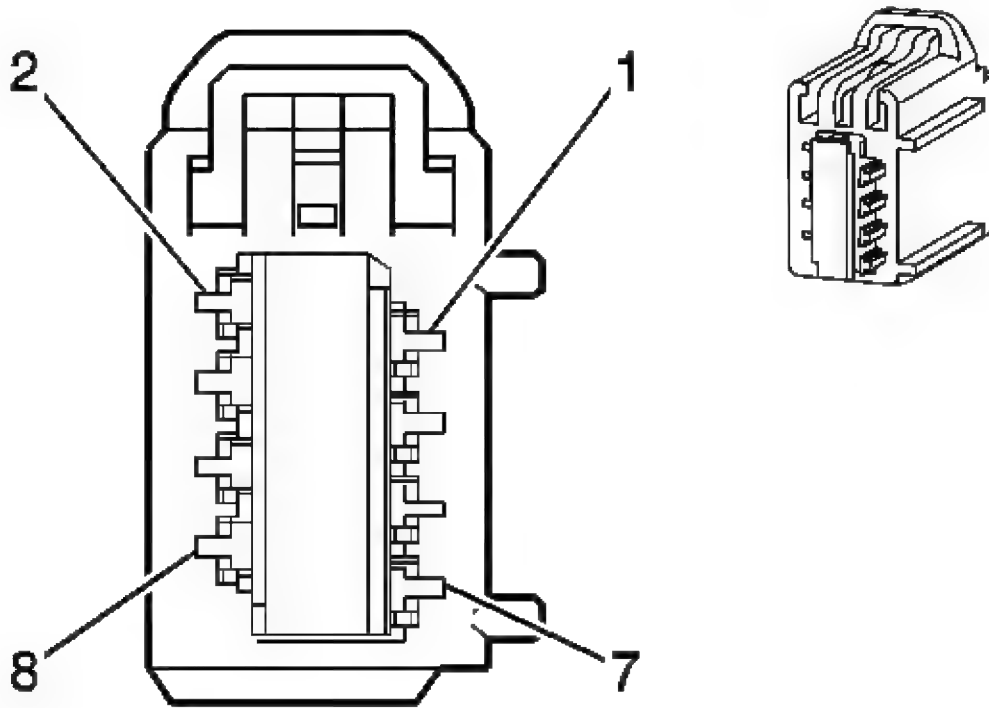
Passenger Front Seat Back Ventilation Heat & Cool Module (KB6) Connector End View
